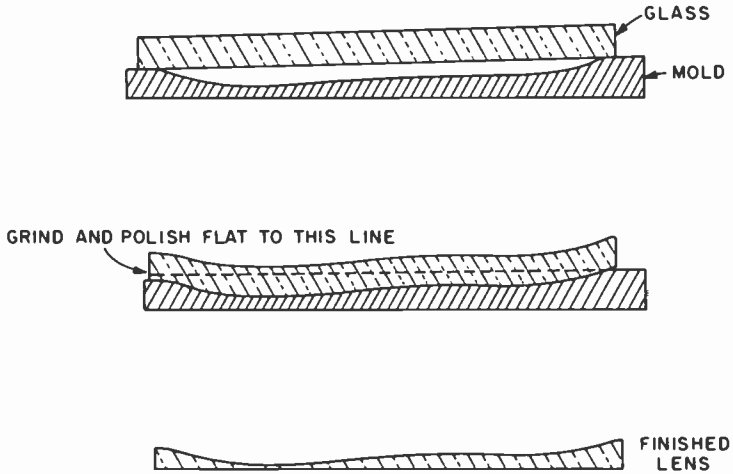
Manufacture of correcting lens by sagging glass plate onto mold.
